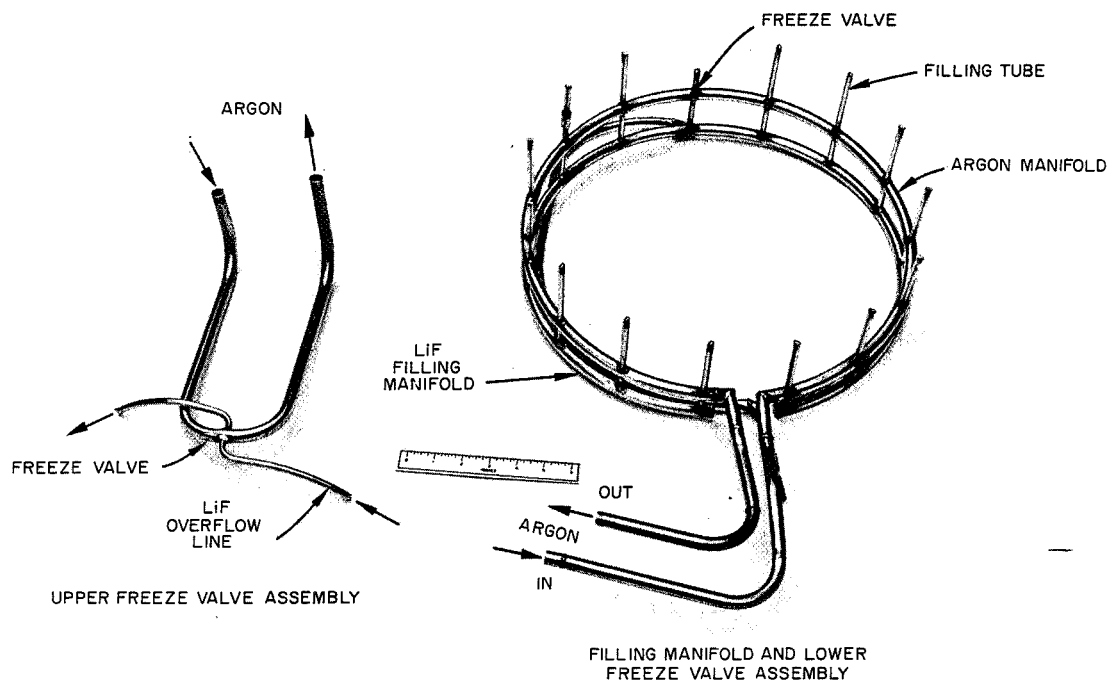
Upper Freeze Valve and Lower Freeze-Valve Manifold.
